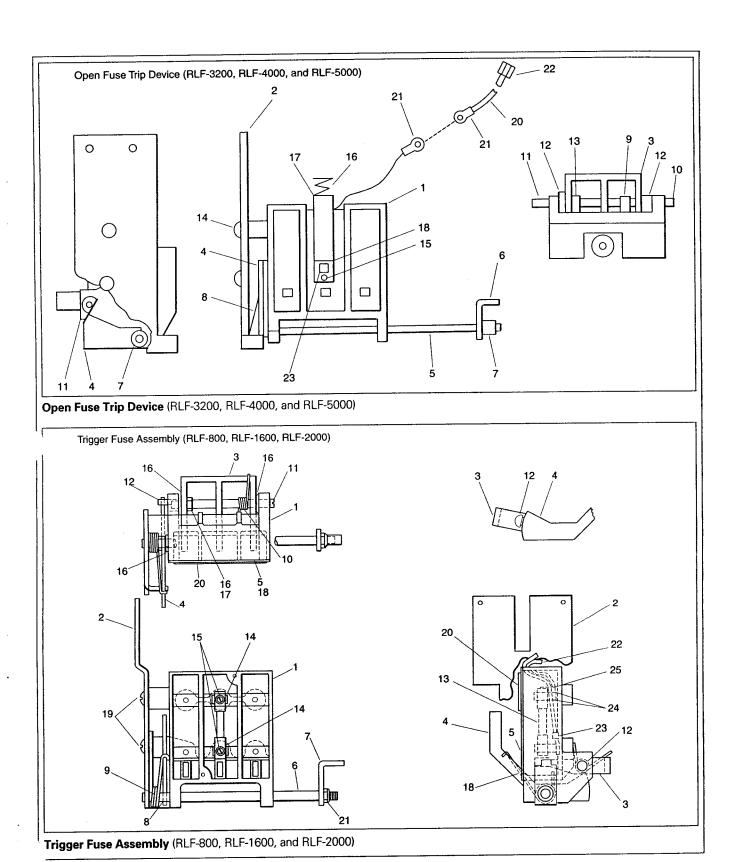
Open Fuse Trip Device Views and Trigger Fuse Assembly Views
